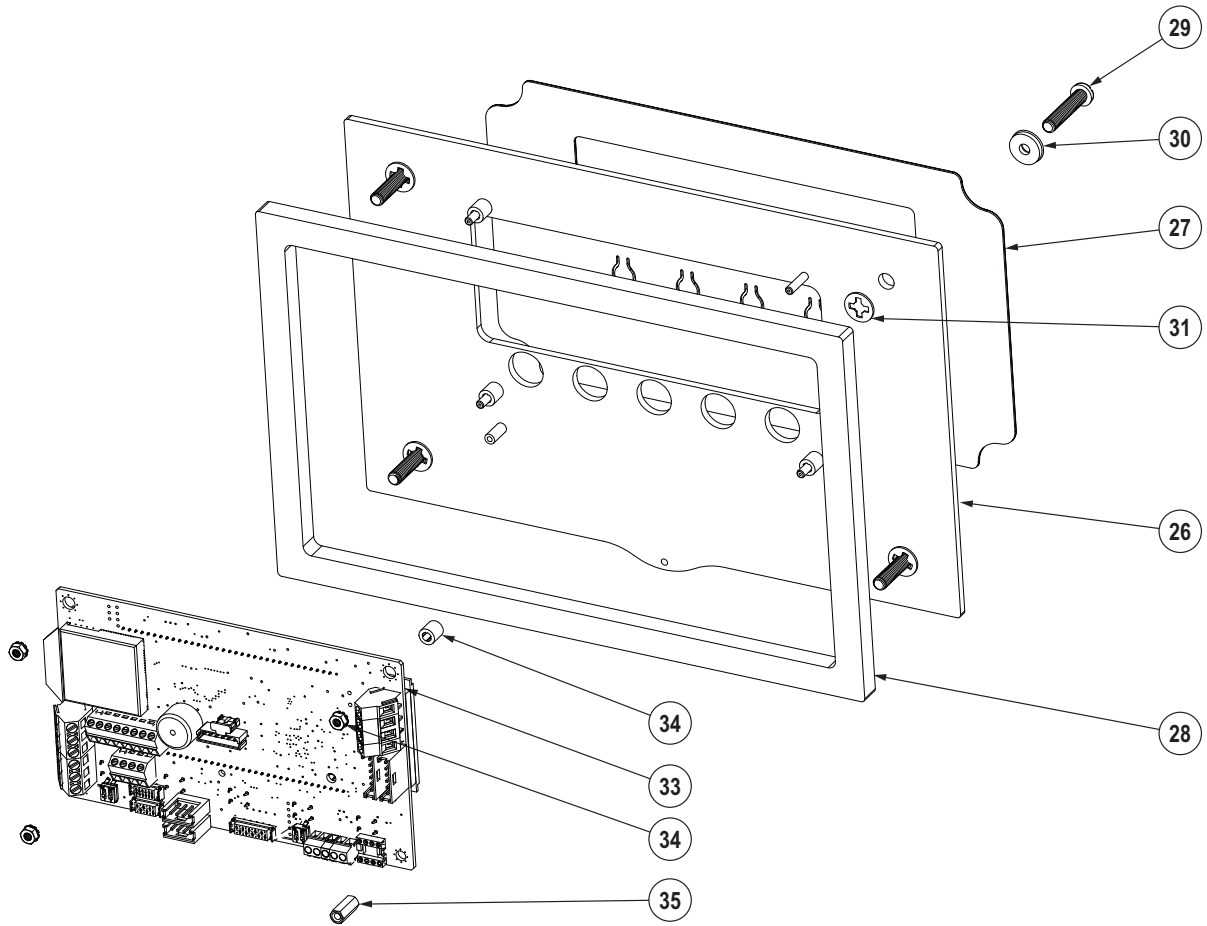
380X Replacement Parts Diagram, Inside Back View
